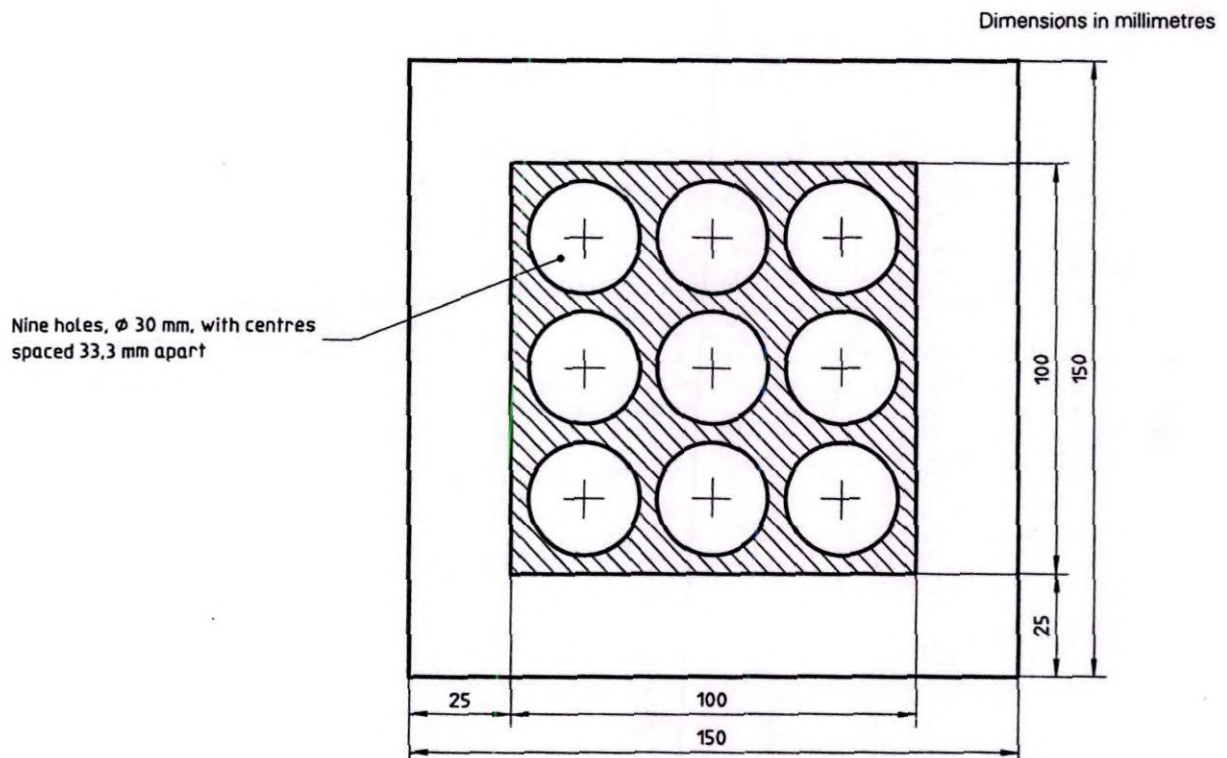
Locations from which standard test pieces are to be cut when testing standard test slabs or commercial flat sheets
